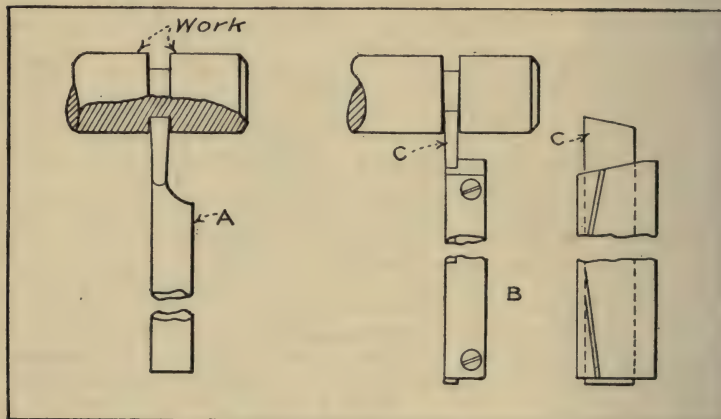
TYPES OF CUTTING-OFF TOOLS
